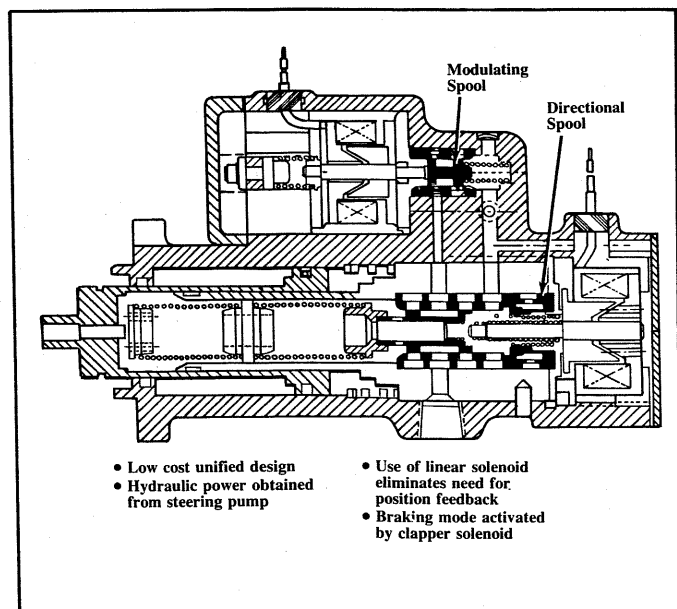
Upgraded Engine Power Turbine Nozzle Actuator
